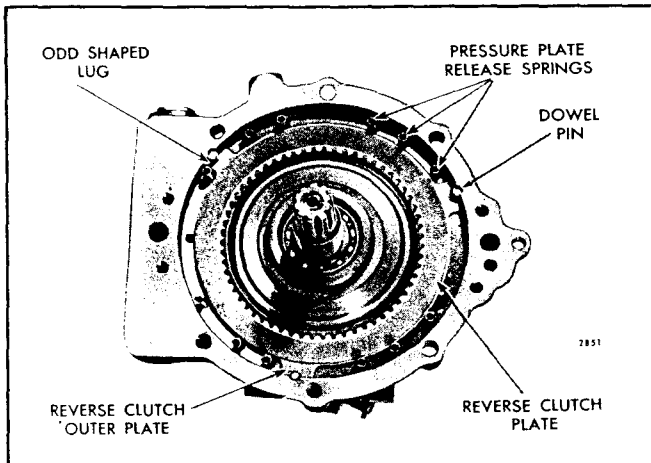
Location of Reverse Clutch Release Springs, Clutch Plates and Dowel Pins
